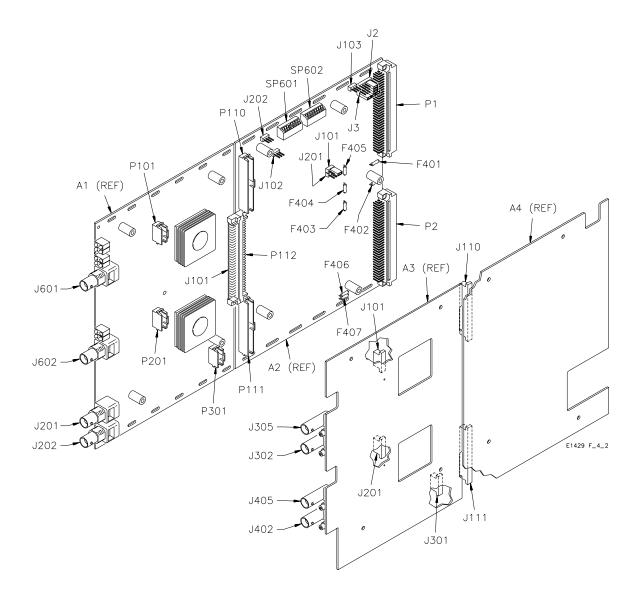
A1 - A4 PCAs Replaceable Parts
